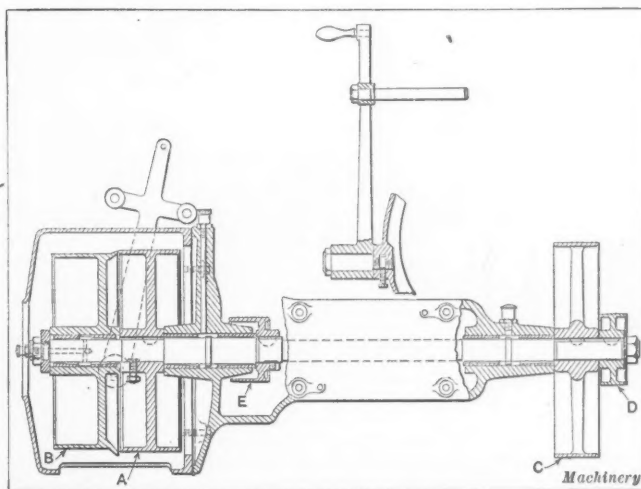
Main Driving Shaft Bracket, showing Connections to drive Wheel-spindle, Pump, and Speed and Feed Box
